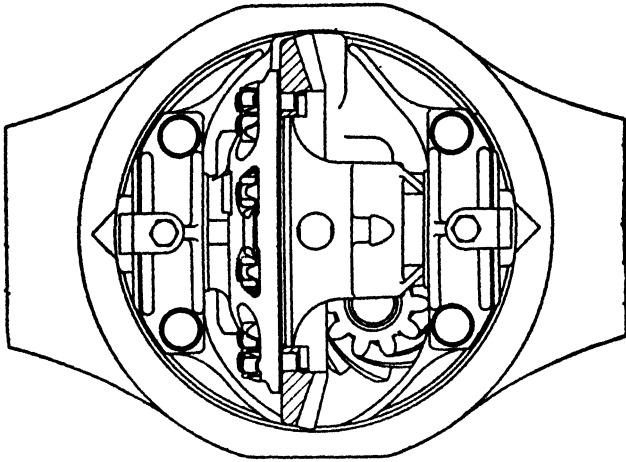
REAR VIEW OF HYPOID-GEAR ASSEMBLY.
